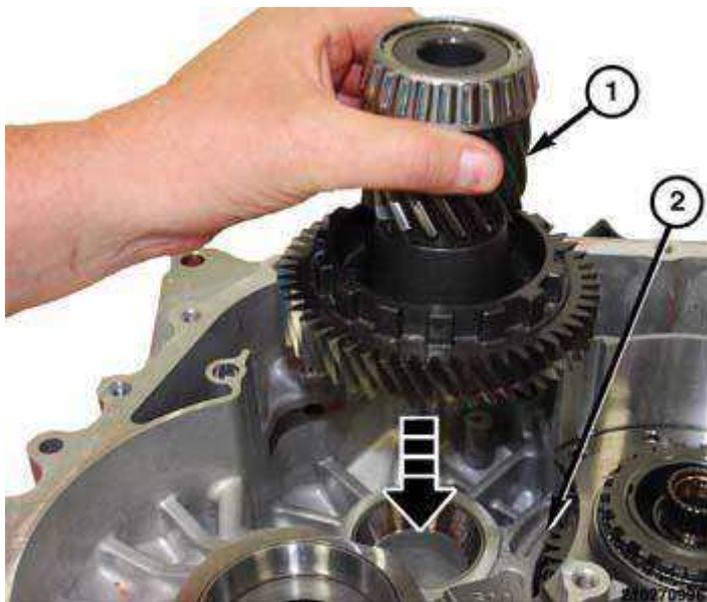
Transfer Driven Gear Assembly & Transaxle
